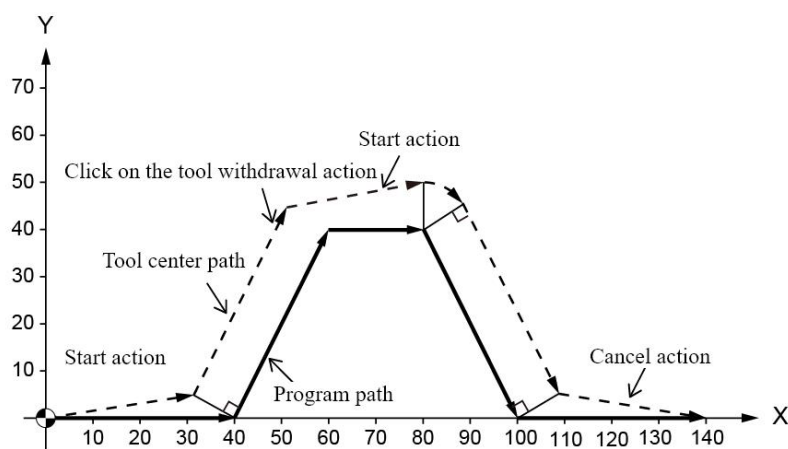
11 Automatic cutter withdrawal with non-moving command
